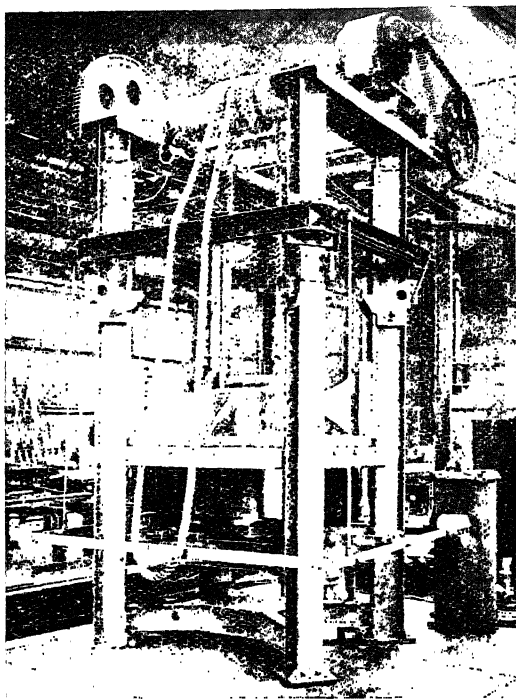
A DROP STAMP FOR SHAPING SHEET METAL
